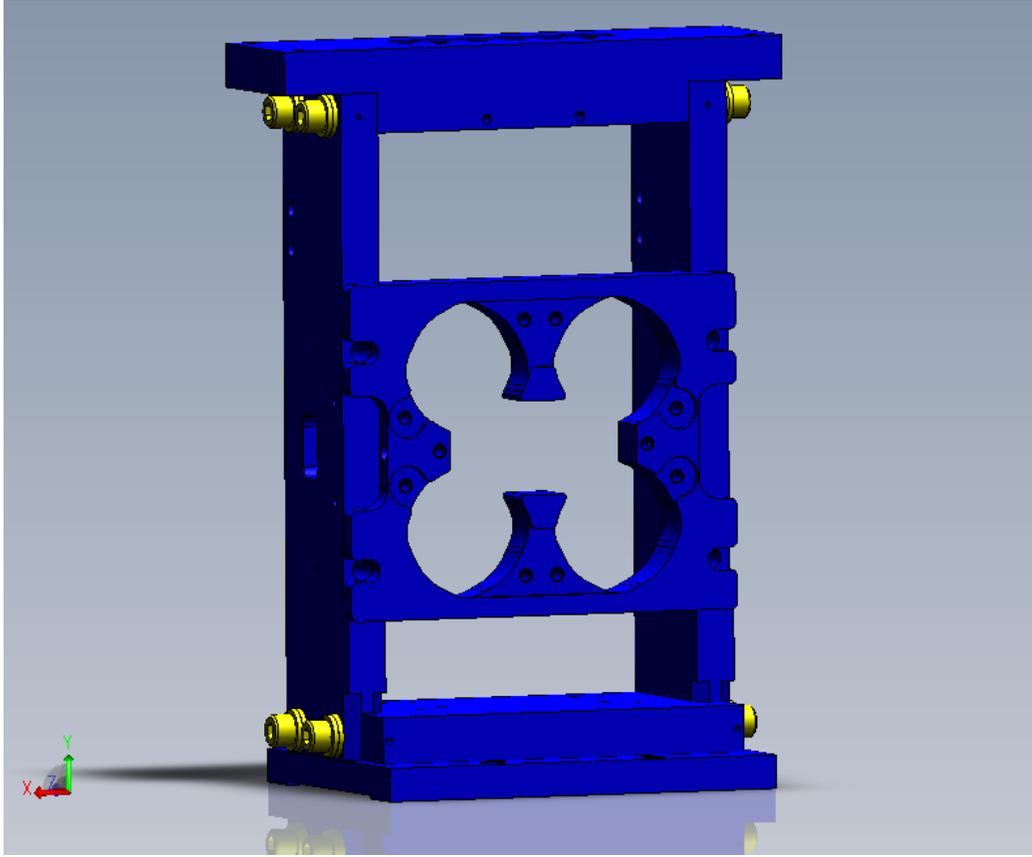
Inserting the Backplane. Shown are the use of lock-washers (the washer underneath the screw head), they are NOT installed.
